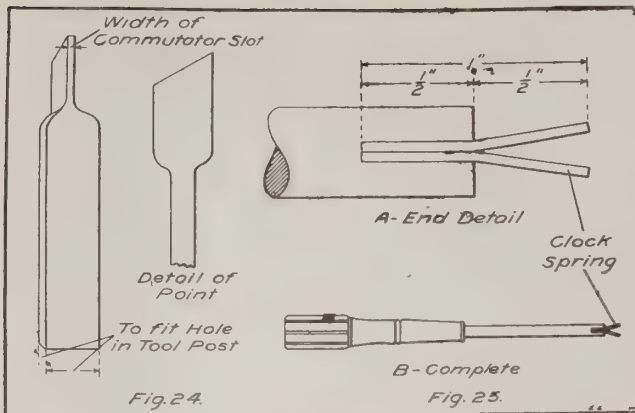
TOOL FOR SLOTTING COMMUTATORS. FIG. 25. SCREW HOLDER FOR SCREW DRIVER.
